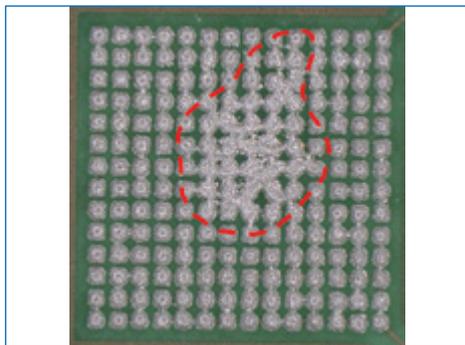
Detail of BGA component ID 1 print quality results after 15,000 print cycles.
